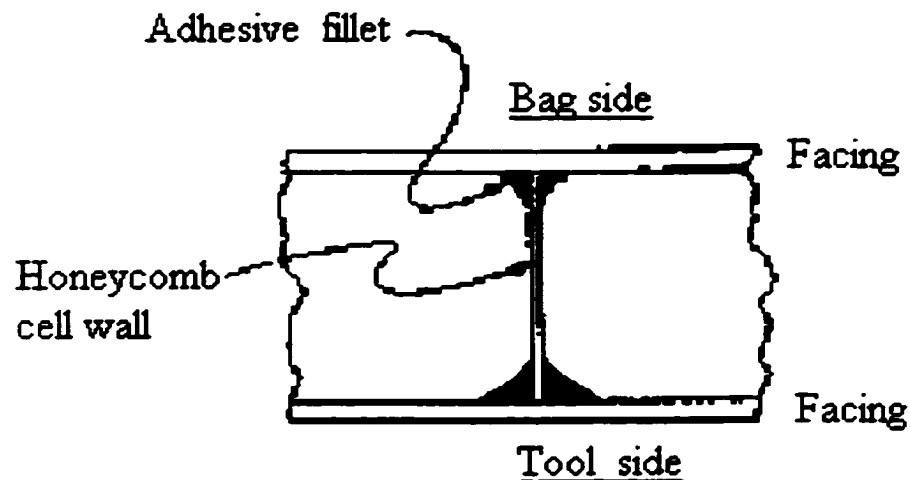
Cross-section of honeycomb structure emphasizing the adhesive fillet formation and size.
